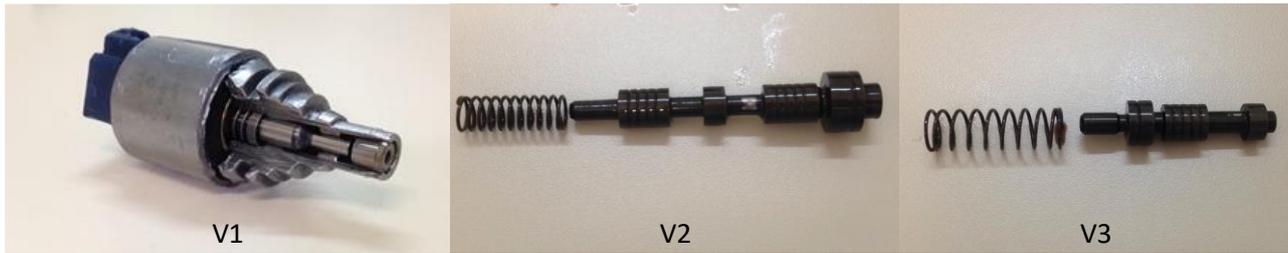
Cut internal view from valve V1 and valves V2 and V3 spools.
